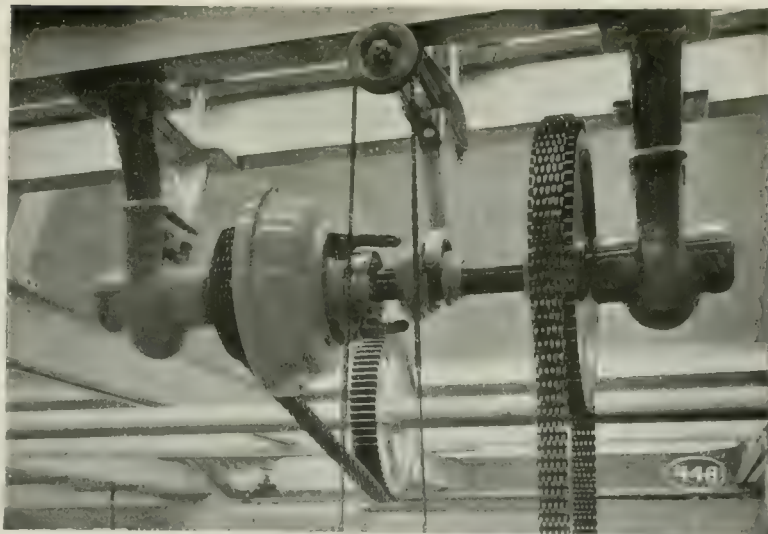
Clutch and Striking Gear used on Chain-driven Countershafting.
